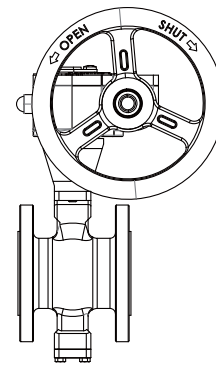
Handwheel Rotation Direction for CLOSED and OPEN position of a gear box
